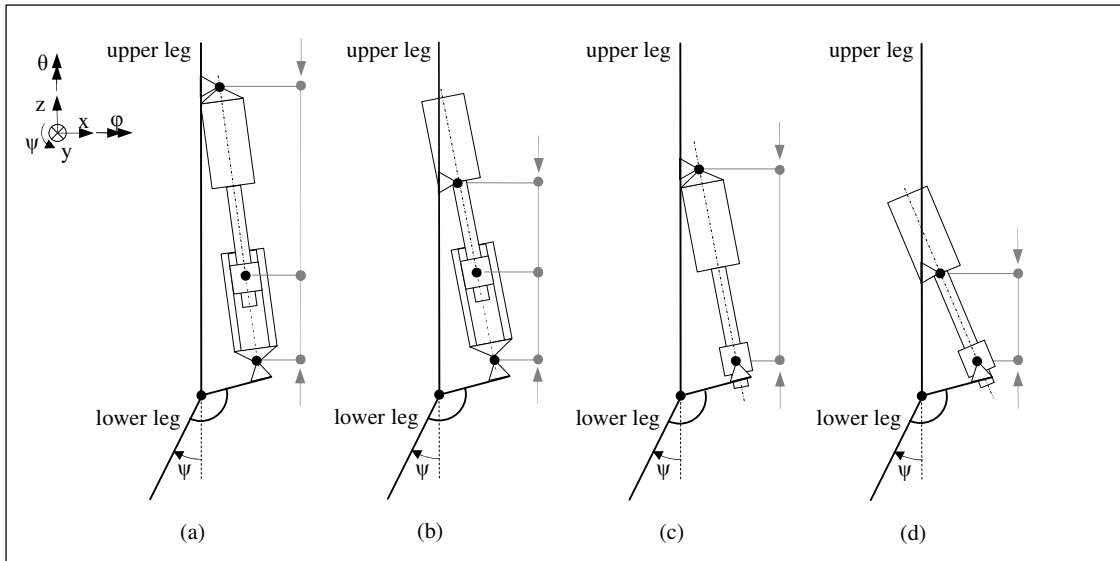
Schematic views of the knee joint actuation with a direct ball screw at the front of the leg. (a) and (b) consist of a motor, spindle, nut and nut sleeve, (c) and (d) consist of a motor, spindle and nut. In (a) and (b), the nut sleeve is supported at the bottom to the lower leg, in (c) and (d), the center of the nut is fixed to the lower leg. In (a) and (c), the motor is supported at the top, in (b) and (c) the motor is supported at the location where the spindle is fixed to the motor. If the actuation is regarded as a chain; (a) and (b) consist of two links and (c) and (d) of one link, all shown in gray (arrows represent a compression force).
